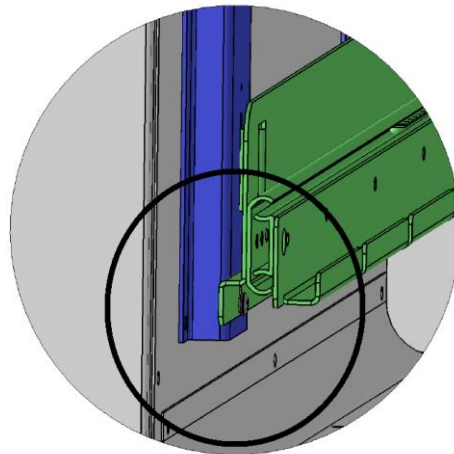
Sliding Shelf Mounting Bracket Installation
